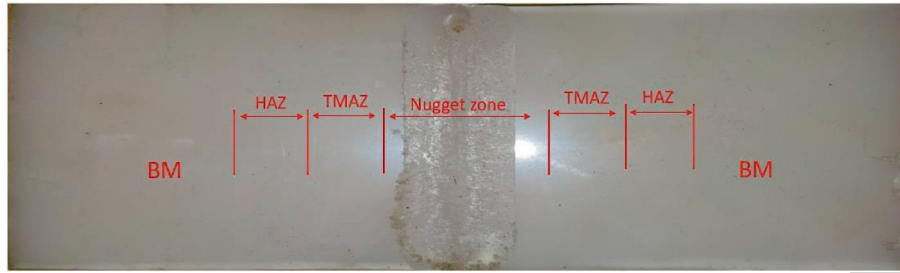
Formed zones in the weld cutaway in the FSW method.
